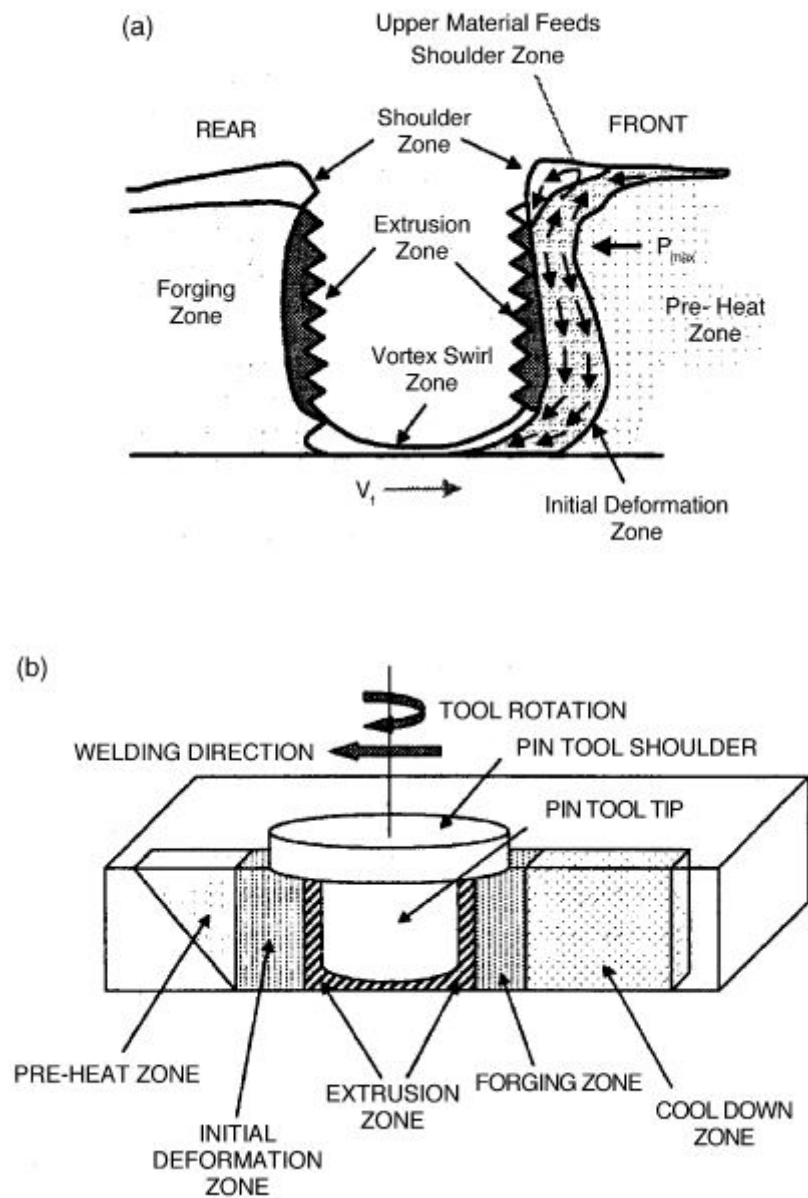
(a) Metal flow patterns and (b) metallurgical processing zones developed during friction stir welding [118].
